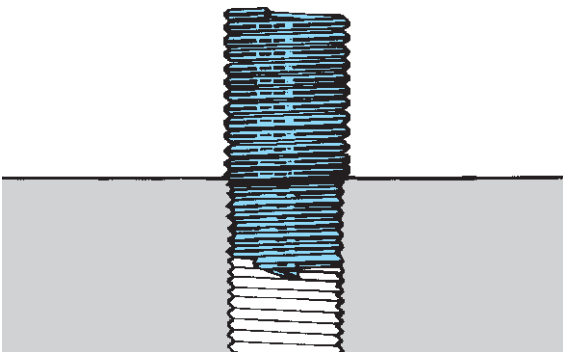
The insert provides new, stock-size threads inside an oversize hole so that the original fastener can be used.
